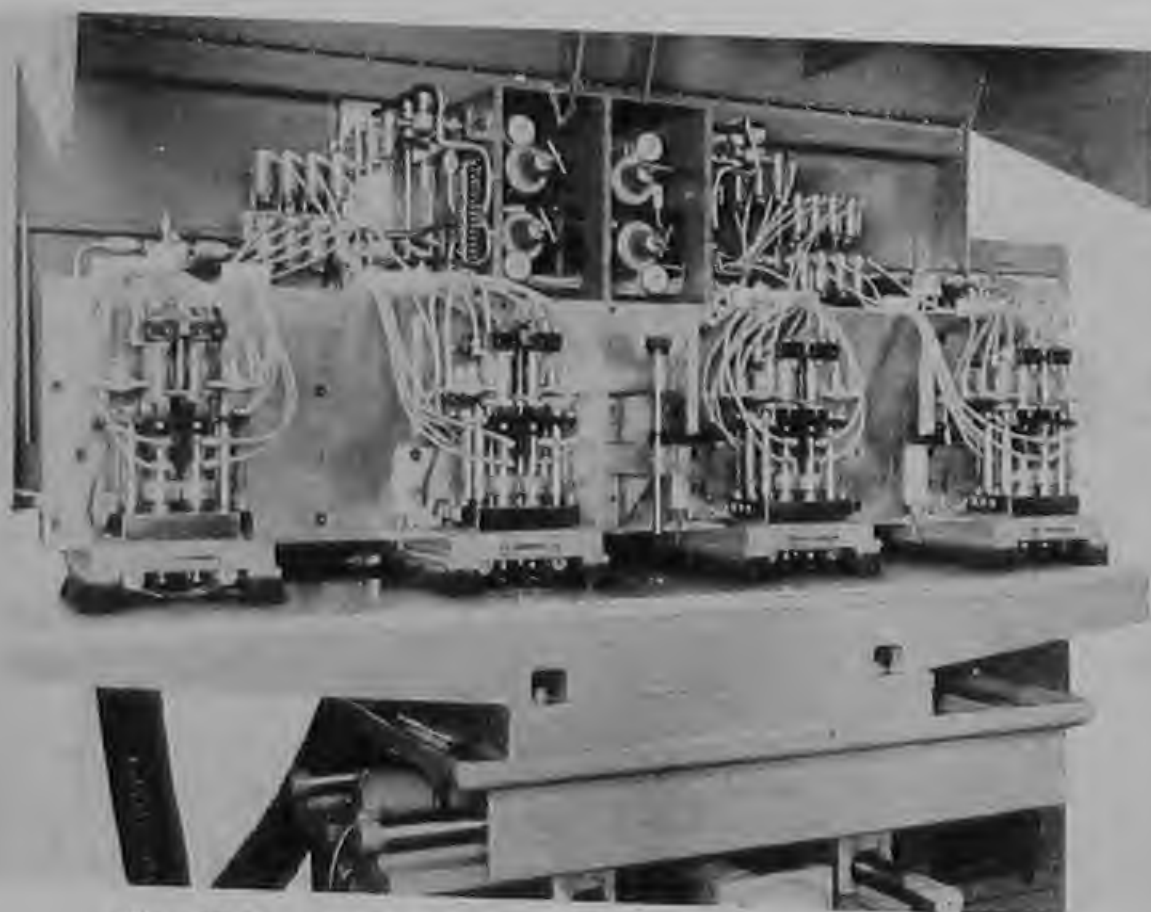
Select-o-Matic circuit board drilling machine with sixteen air turbine drilling spindles with aerostatic bearings
